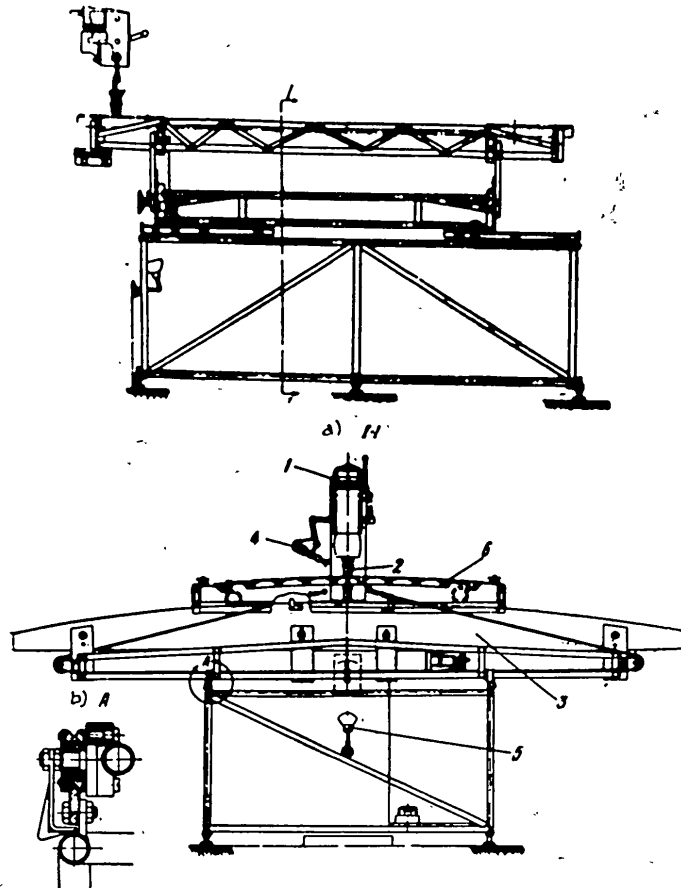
Construction of Support and Conveying Equipment for Drilling, Countersinking, and Riveting of a Panel on the Press KP-310
